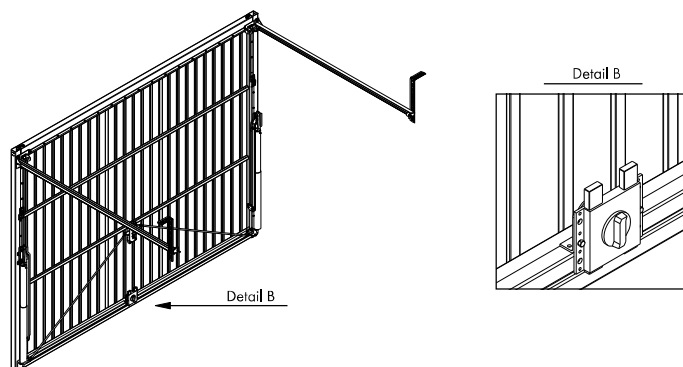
Up and over door bolted to the threshold with a Gerda lock.
